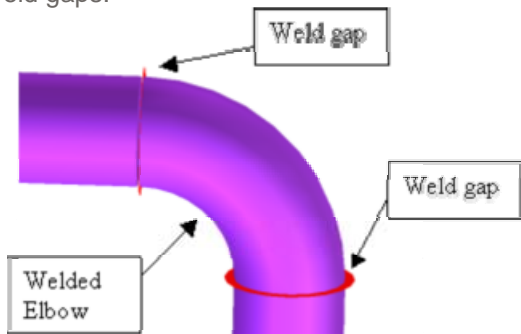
Explanation: The weld gaps functions allow the insertion of welding gaps into the pipe-line. The insertion can be made at the Pipe, Spool or Part levels.
